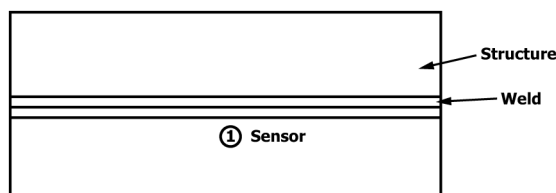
Typical Sensor Placement for Single Channel AE Monitoring of a Linear Weld
